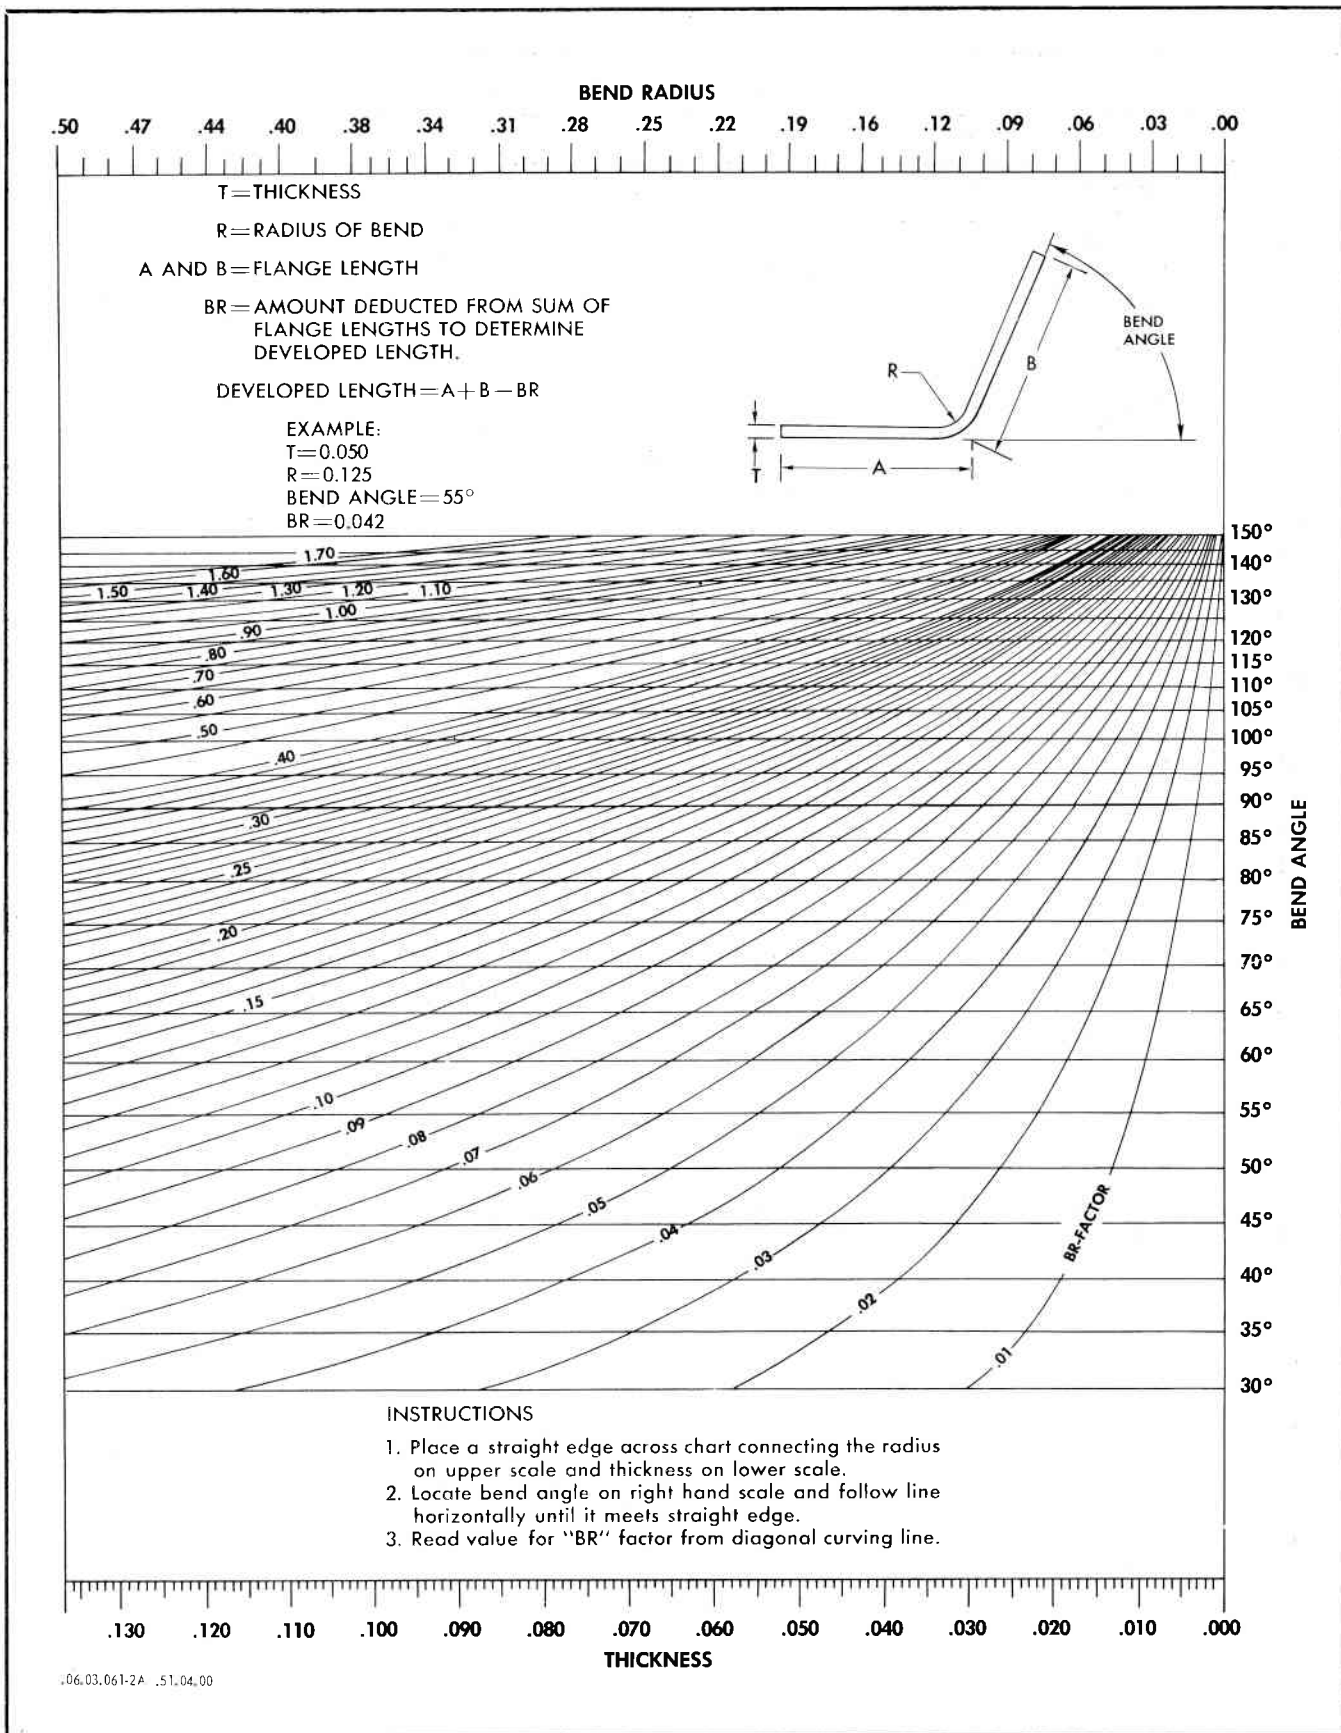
Flat Pattern Layout (Sheet 2 of 3)
